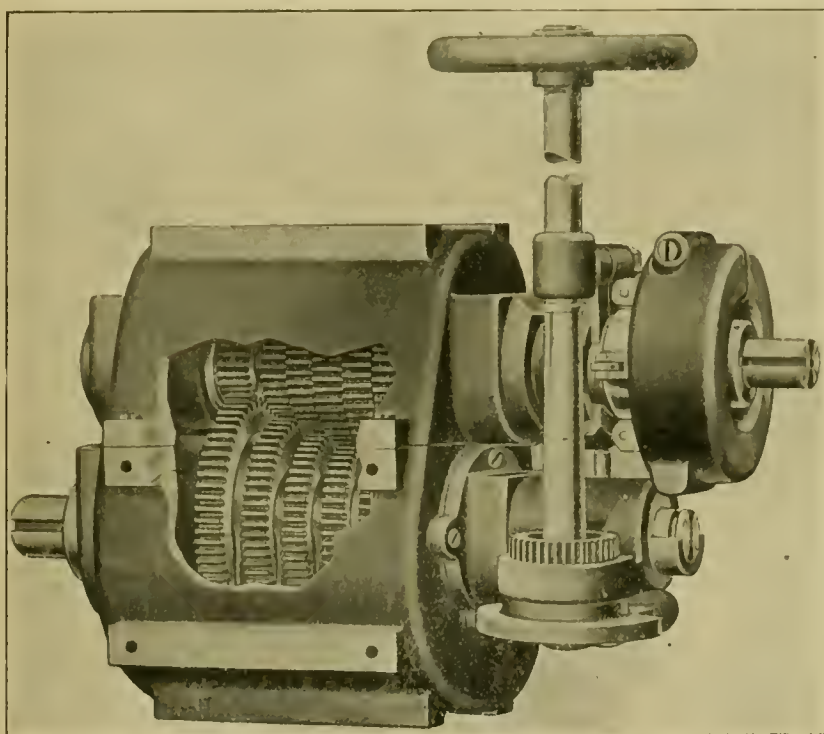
GENERAL VIEW OF THE NEW SPEED CHANGER, SHOWING PADS FOR ATTACHING TO HANGER OR MACHINE.
